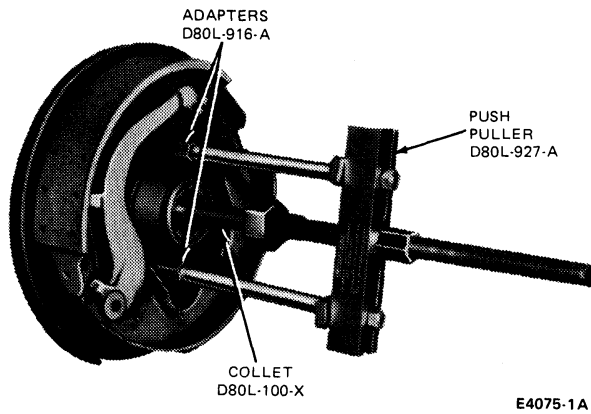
Removing Bearing—Dana Model 60 Semi-Floating Axle
